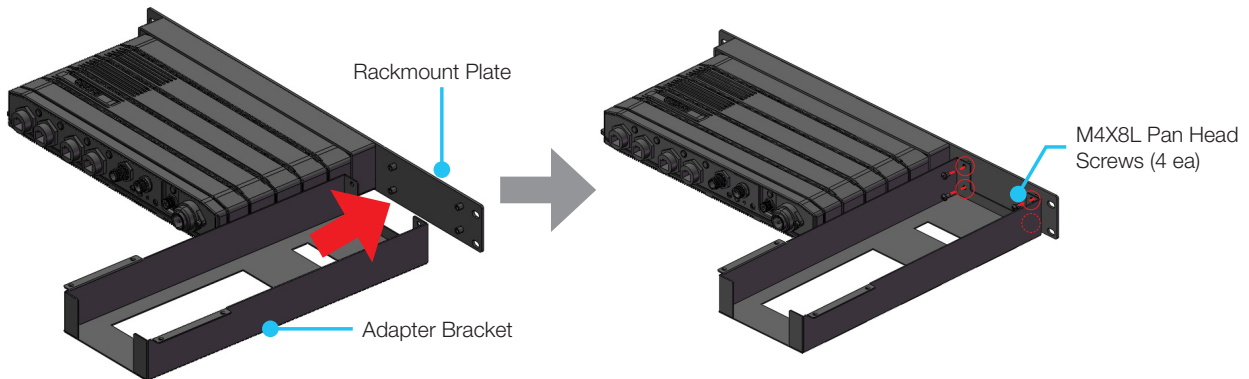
Attaching Adapter Bracket to Rackmount Plate
